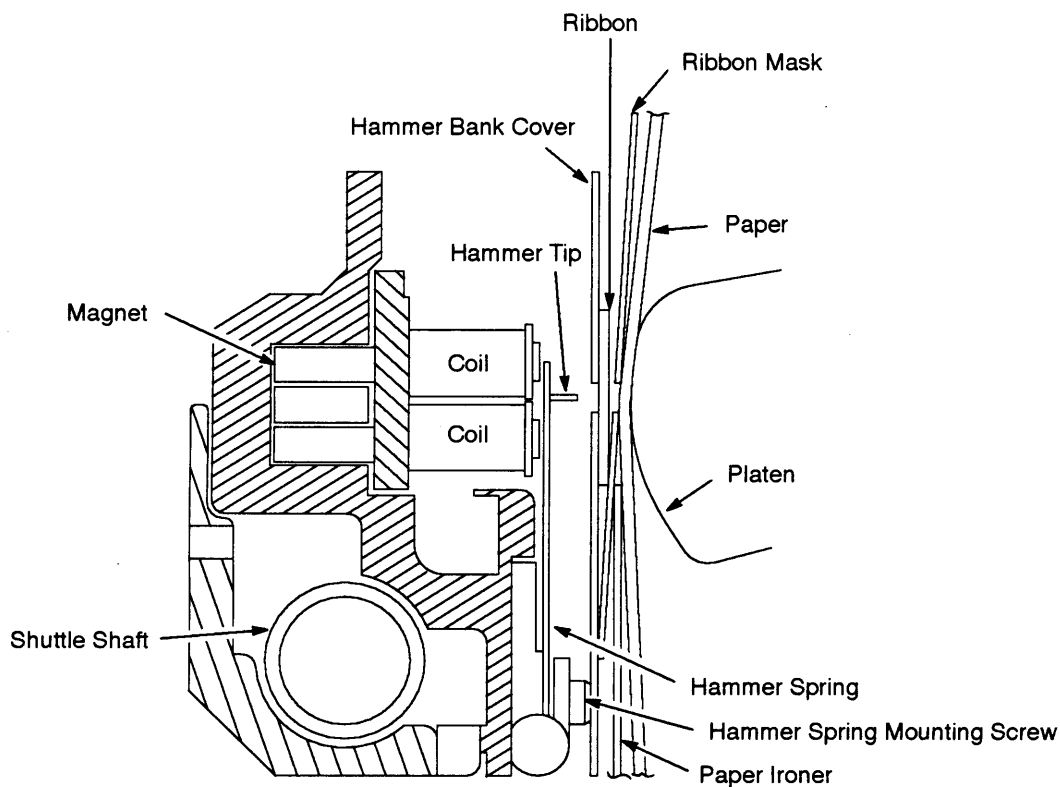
Cross Section of Hammer Bank, showing Hammer Spring and Shuttle Arrangement
